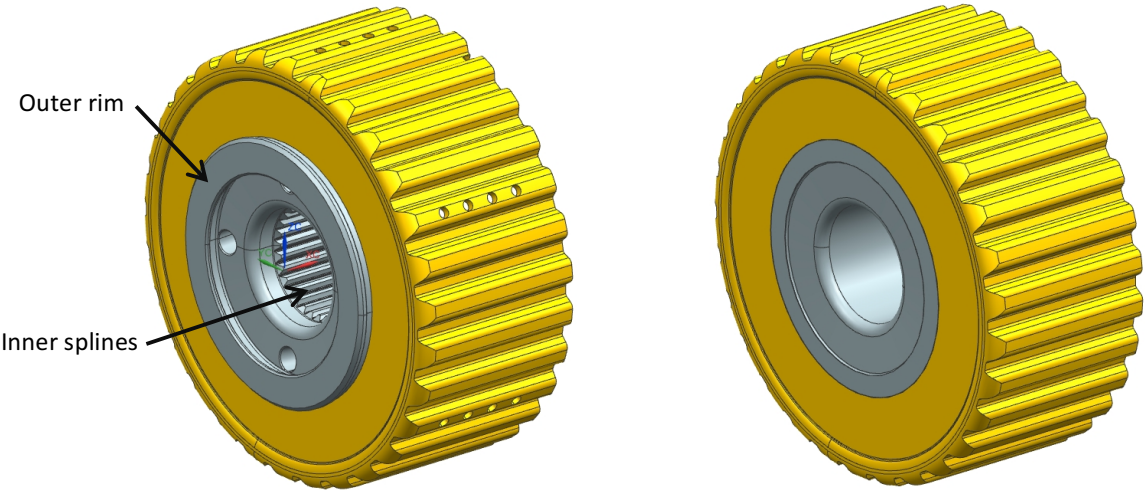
Original Haldex LSC GenV (left), modified clutch drum (right).
